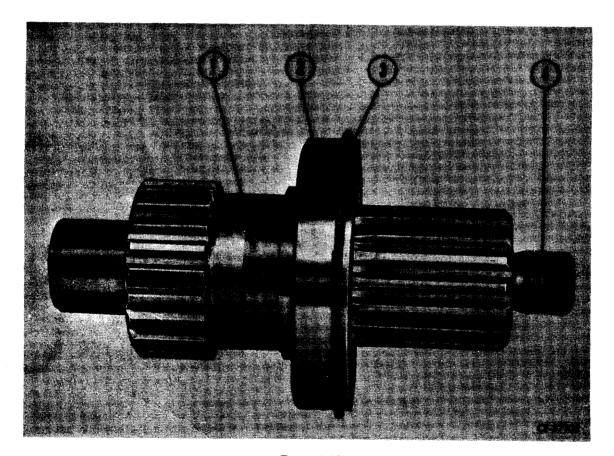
Output Shaft - Rear Axle Disconnect.
